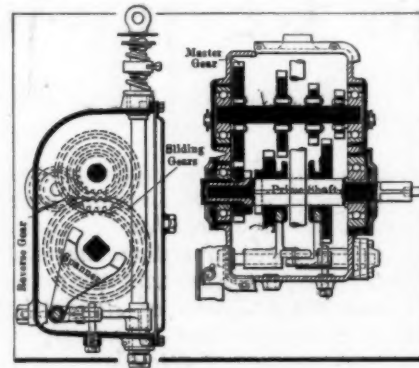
Section through the transmission gear showing the method of fastening the gears on the shaft
